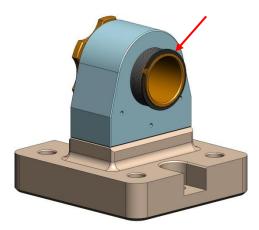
Retaining ring in groove on back of Locker Sleeve.
